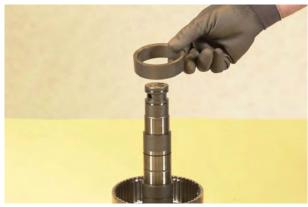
Refer to CLEANING AND INSPECTION p. 8. The bleed hole in the piston must be clean and free of any foreign material. Install clutch piston outer seal. Size as described in Figure 59.
